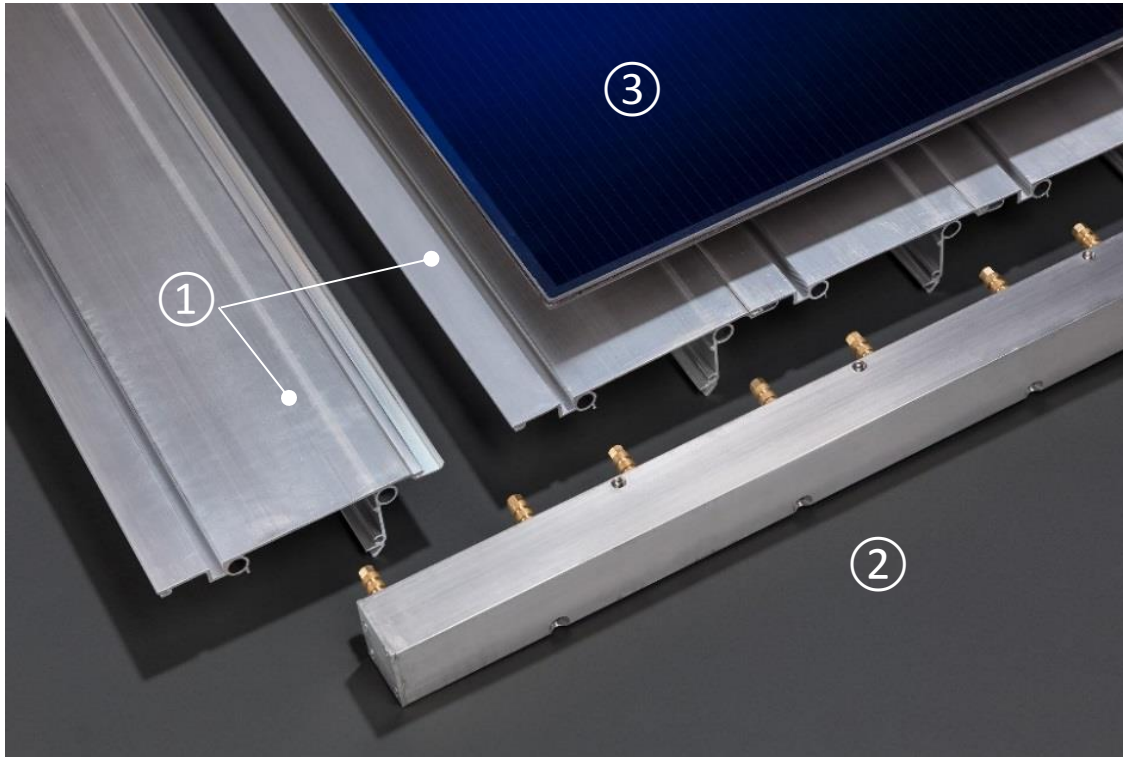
(Unassembled) main components of the PV/T system: Extruded profiles ①, manifold ② and PV module ③.
